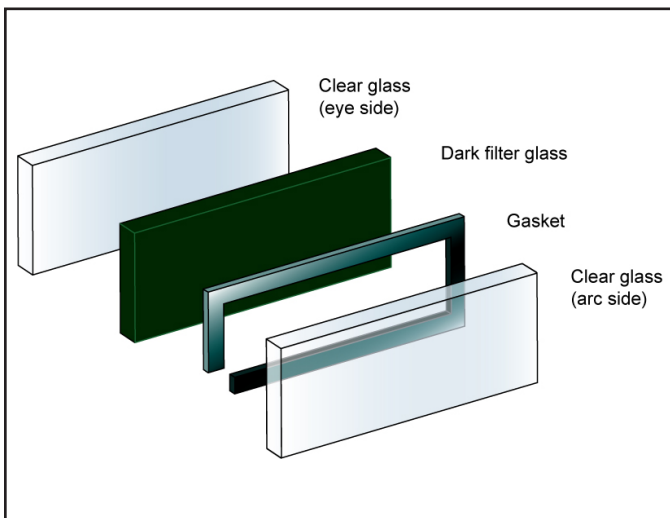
Parts of a Filter Lens on a Welding Helmet
